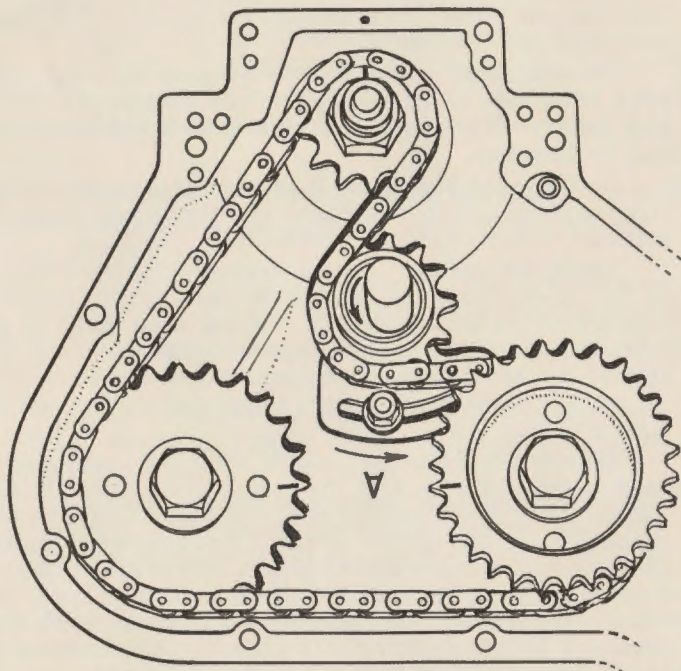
Timing marks and direction in which eccentric and locking plate must be moved in order to adjust the timing chain.
